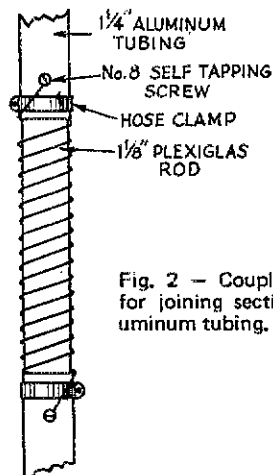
Coupling details for joining sections of aluminum tubing.
